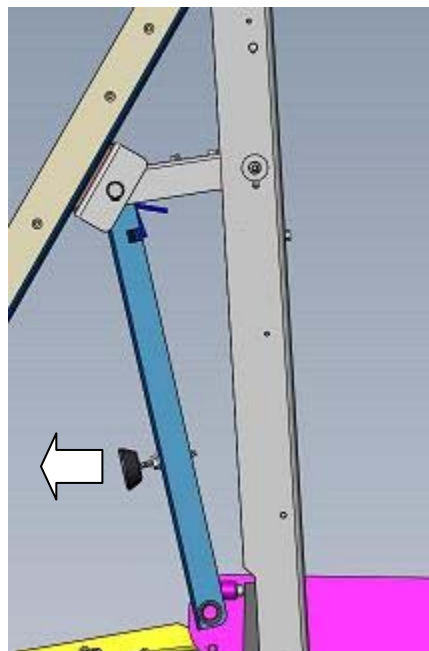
ASSEMBLED KNUCKLE LINK ASSEMBLY
